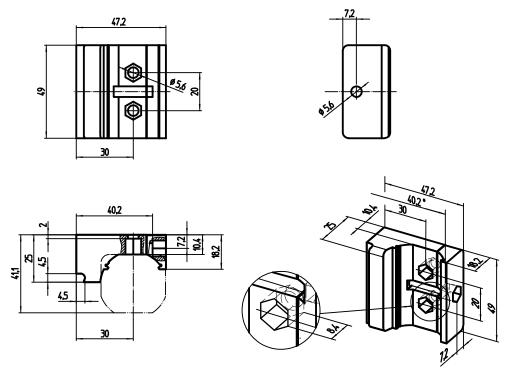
Dimensional drawing of the QuickFix bracket (2066048)
